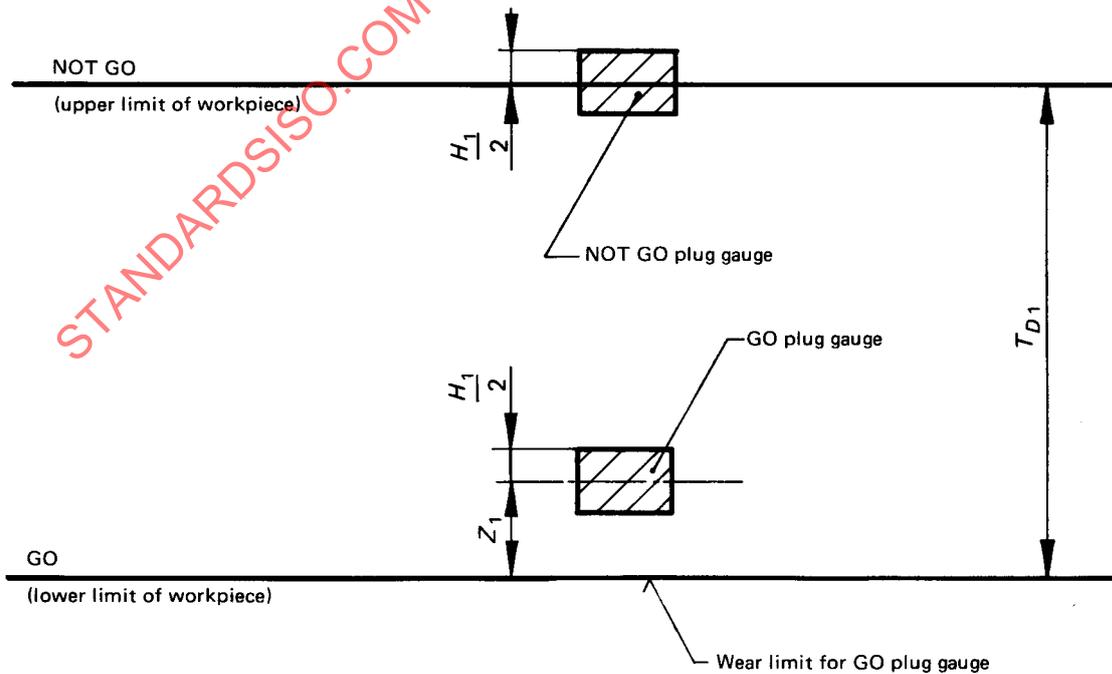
Tolerance zones for plain gauges for minor diameter of internal threads (diagram)
